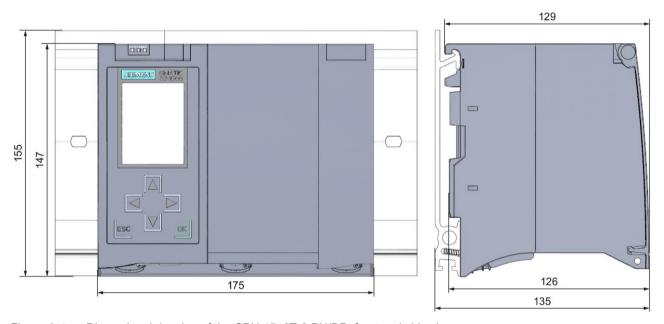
Dimensional drawing of the CPU 1516T-3 PN/DP, front and side view
